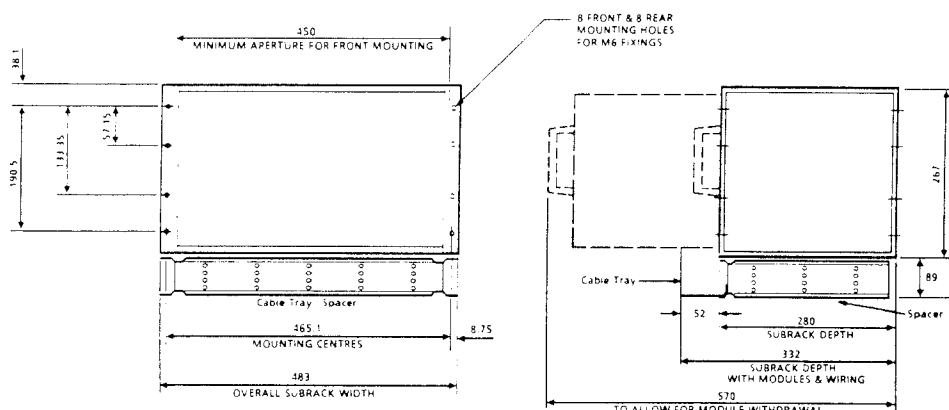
Subrack and Spacer/Tray Dimensions
